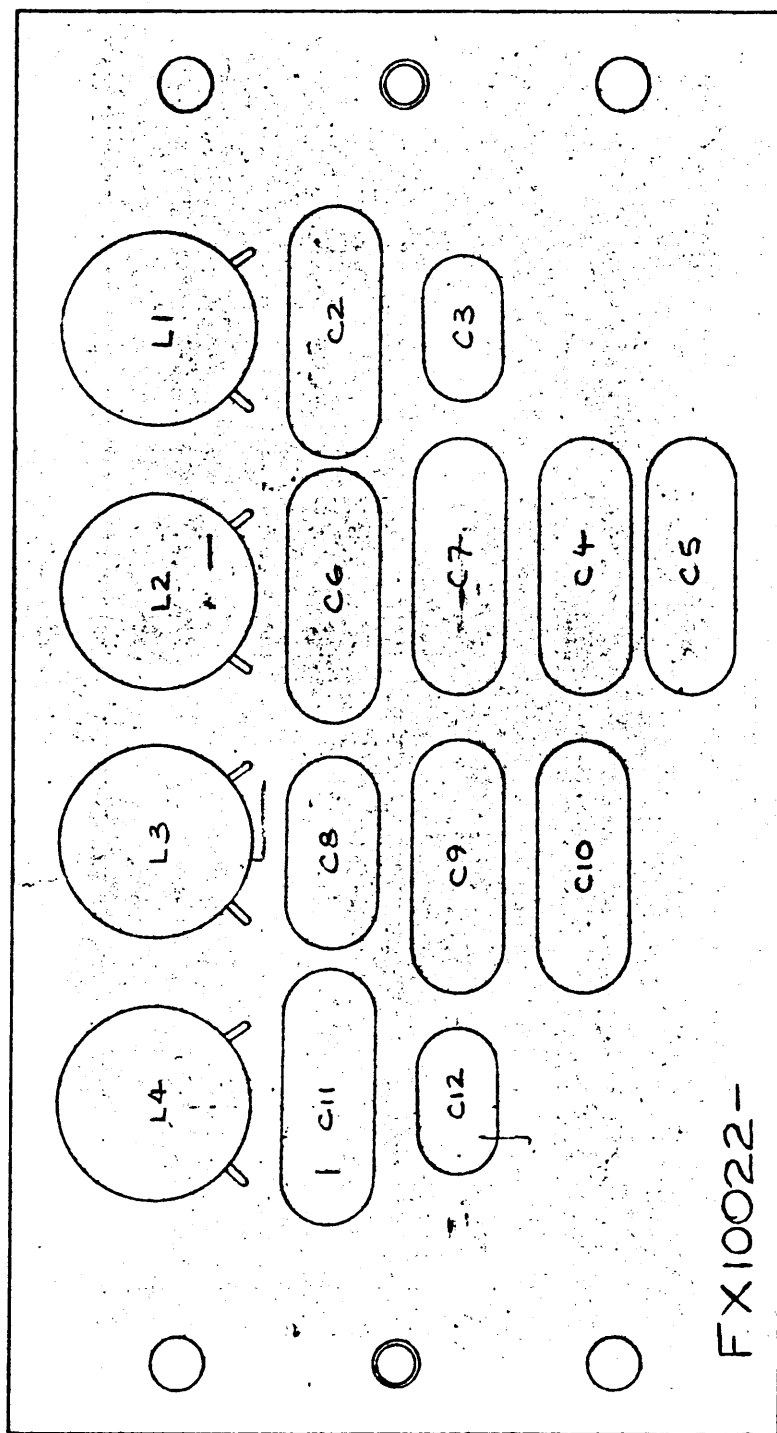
COMPONENT LOCATION, LOW PASS FILTER ASSEMBLY
